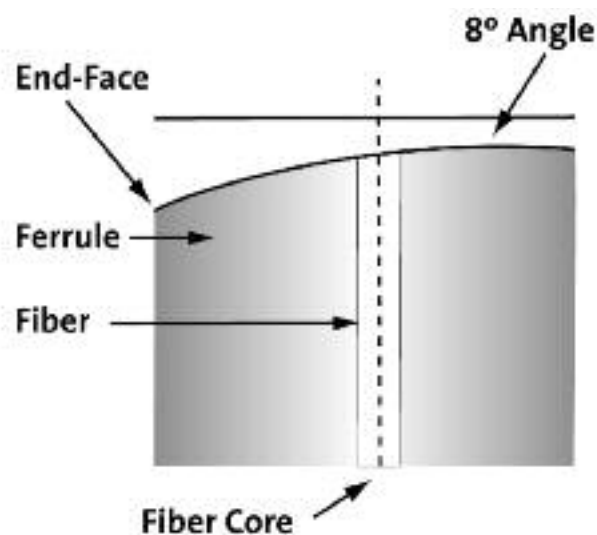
APC Connector End-Face | Drawing ZA-3127
